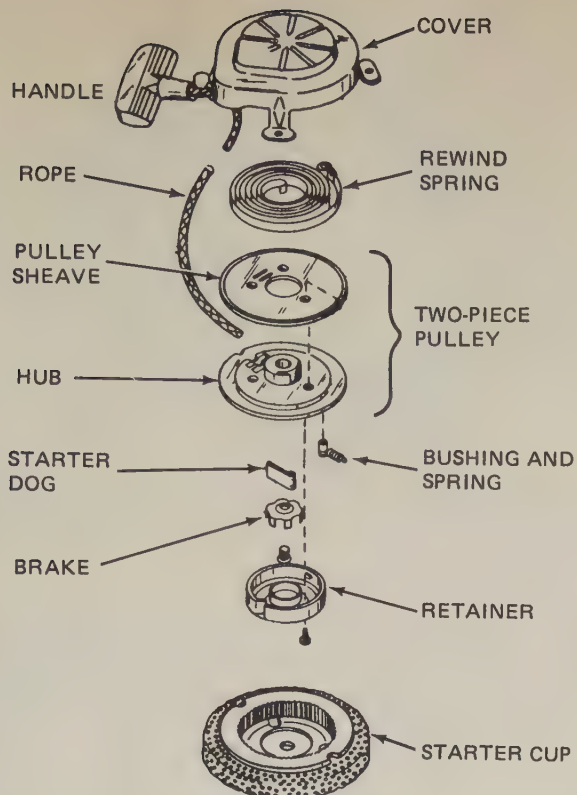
Disassembled rope-rewind starter with two-piece pulley.
